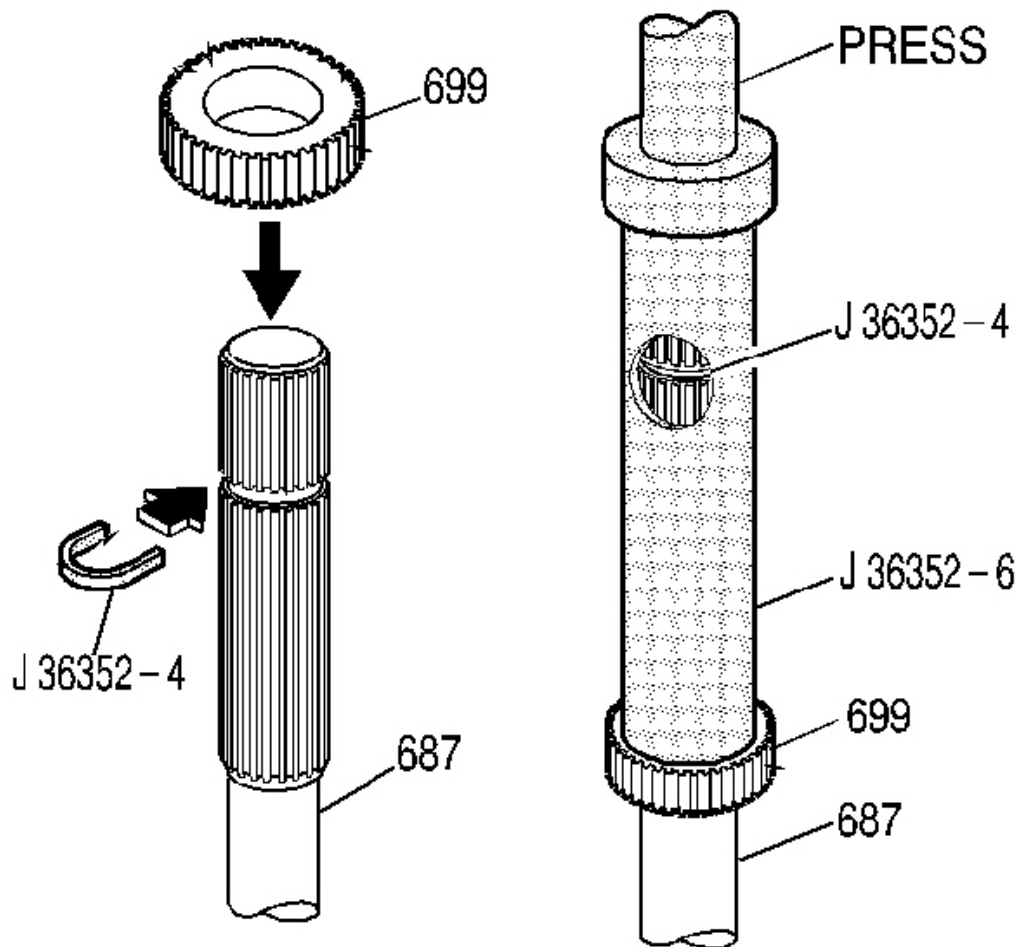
Pressing Internal Speed Sensor Rotor Onto Output Shaft
